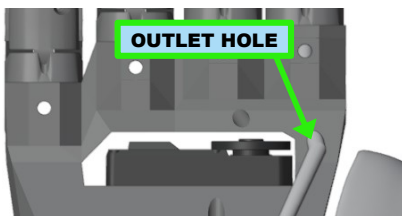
Inserting the tube into the tendon outlet hole (rear view)
